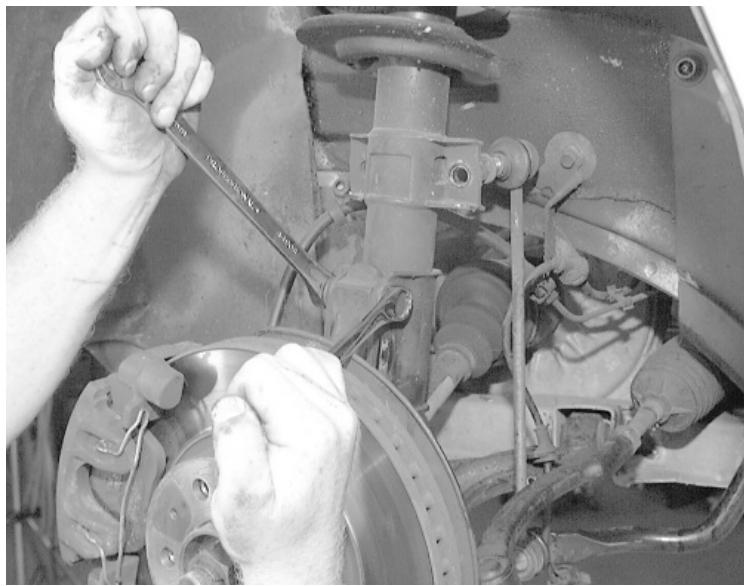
Remove the two strut-to-knuckle bolts and nuts
